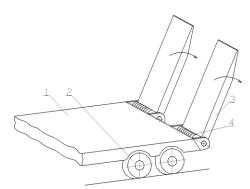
Loading ramp with torsion springs 1-trailer platform; 2-pneumatics; 3-loading ramp; 4-torsion spring.
